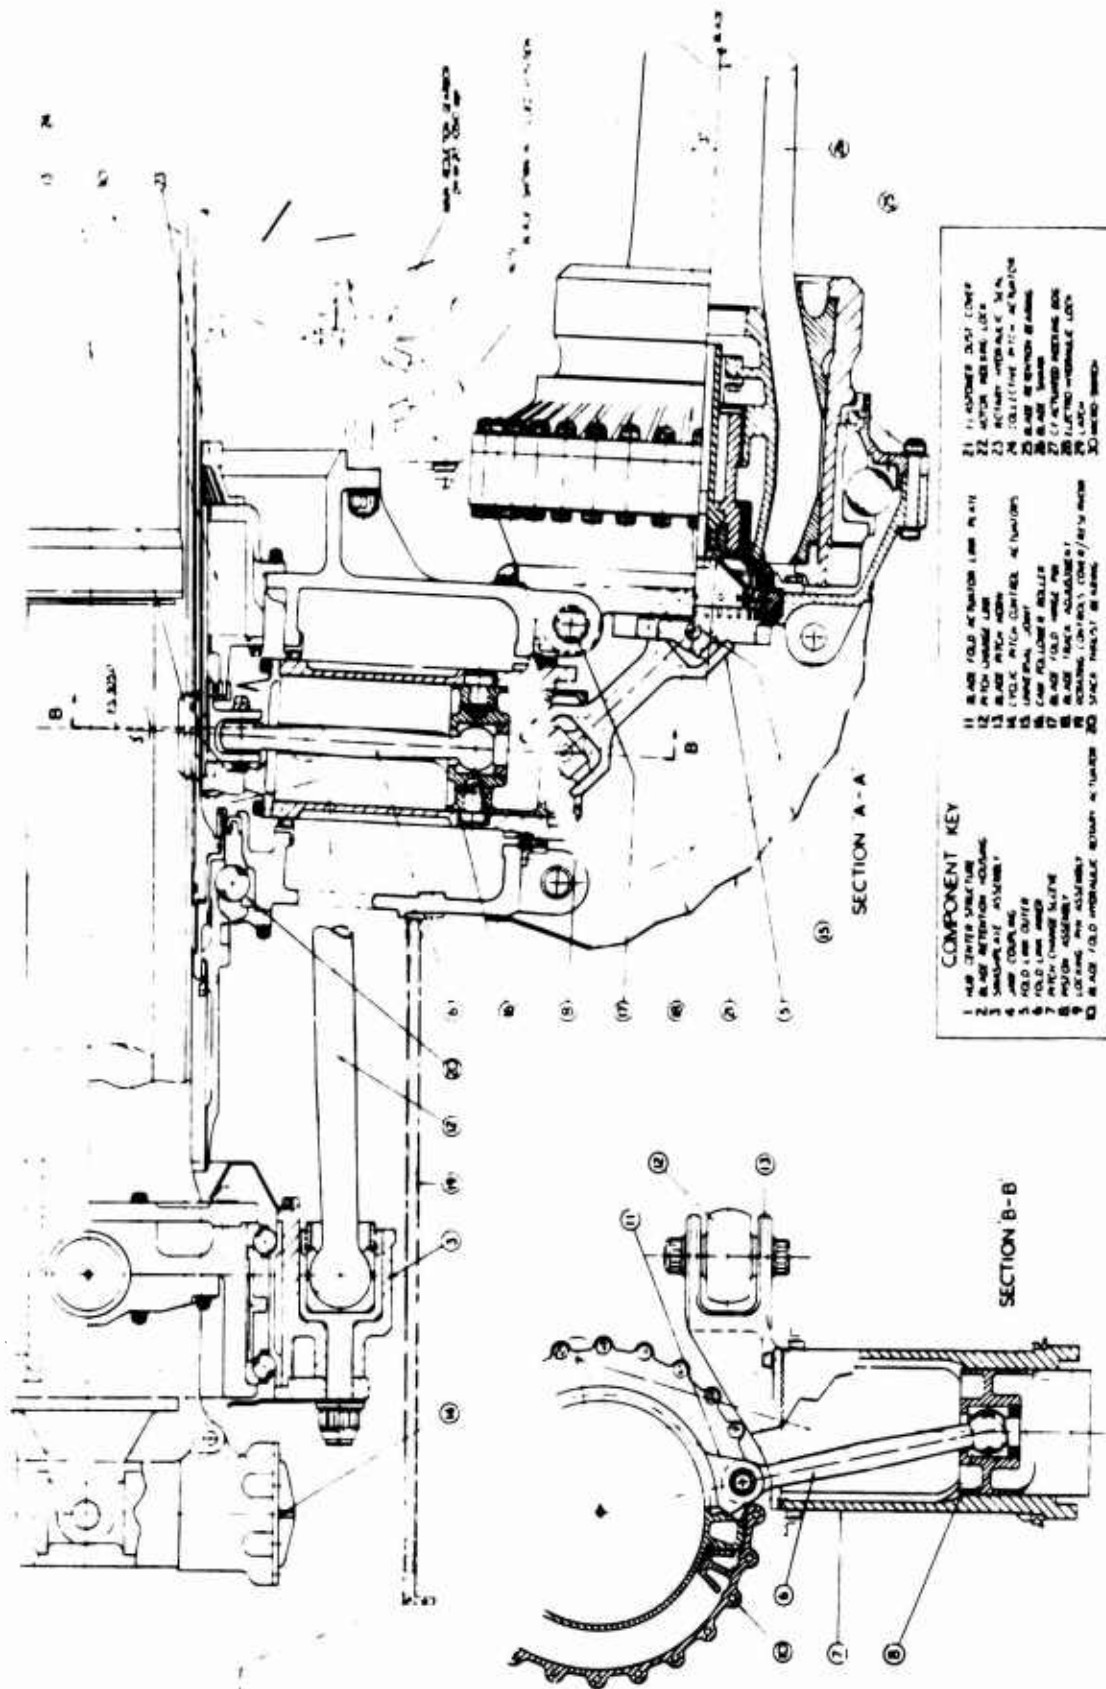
Rotor Hub and Blade Folding Assembly (Sheet 1 of 2).
